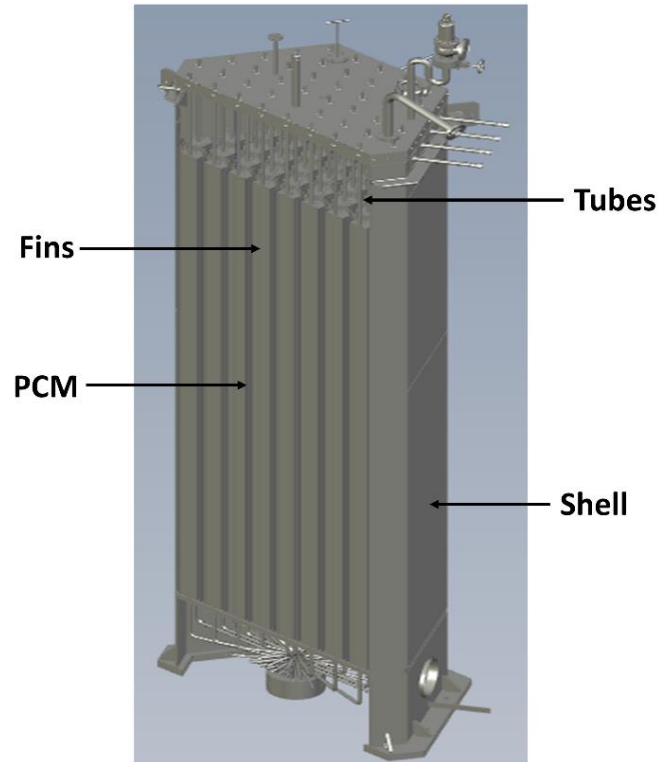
Drawing of a shell-and-tube LHTES [internal document CEA]
